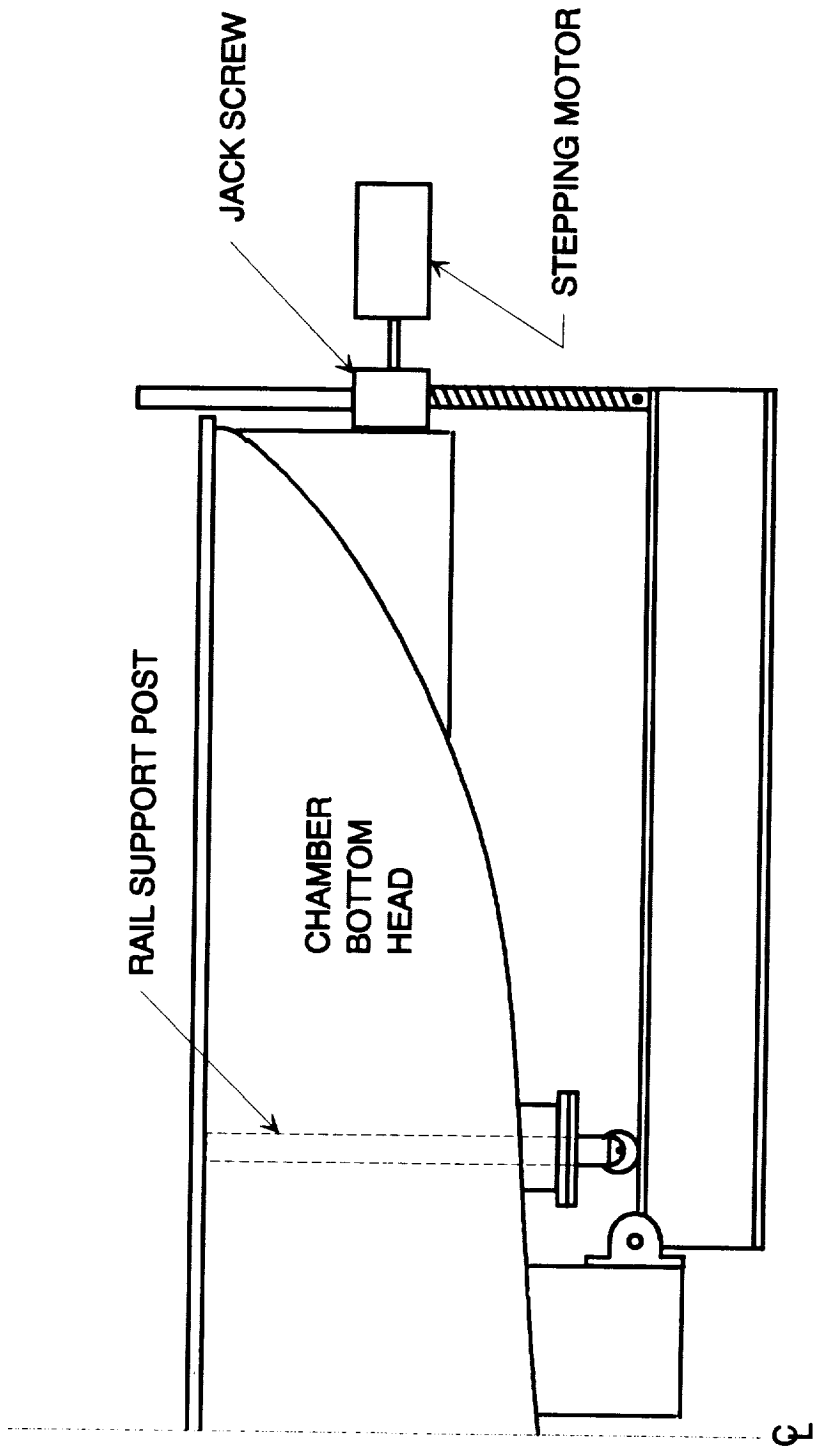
FINE ELEVATION ADJUSTMENT MECHANISM
